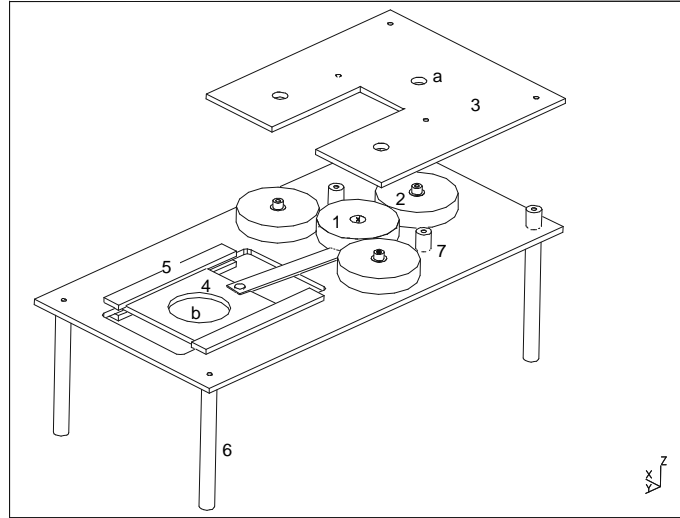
Exploded View of Planetary Gear Drive Used in Periodic Loading Device.
